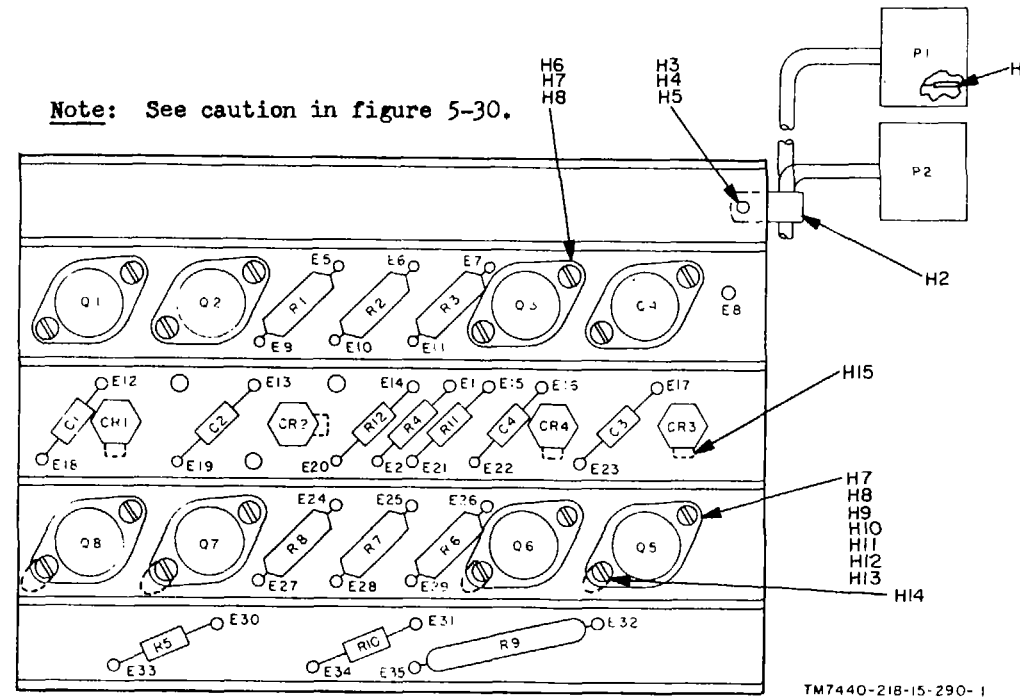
Heatsink components assembly (PS1A5), components location diagram.
